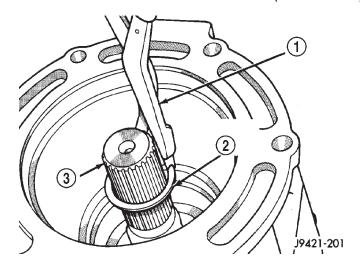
Rear Bearing Snap Ring Removal—4WD
